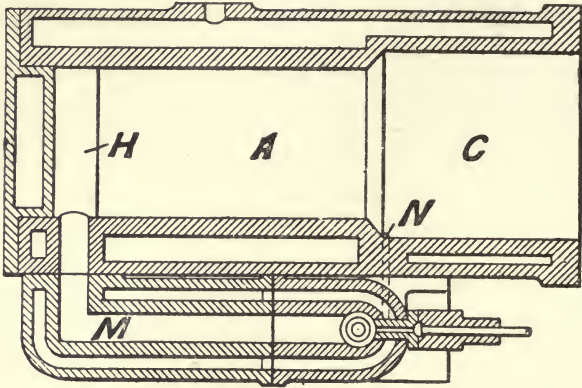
Trent Gas Engine (horizontal section of cylinder).
